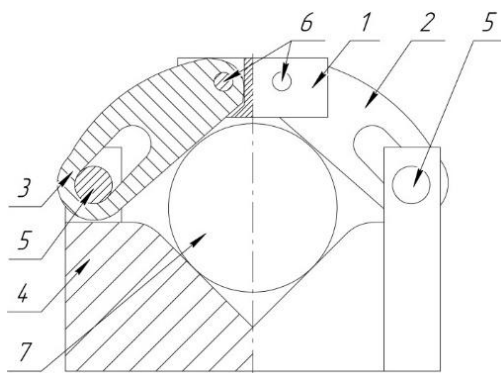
A forging broaching machine with the movable working elements: 1 is a top die; 2, 3 are movable working elements; 4 is a bottom die; 5 are rotary joints of the bottom die; 6 are rotary joints of the top die; 7 is a workpiece
